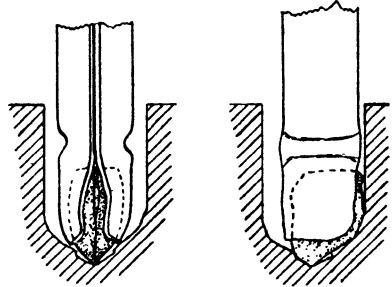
Method of mounting diamond for drilling holes in glass.
